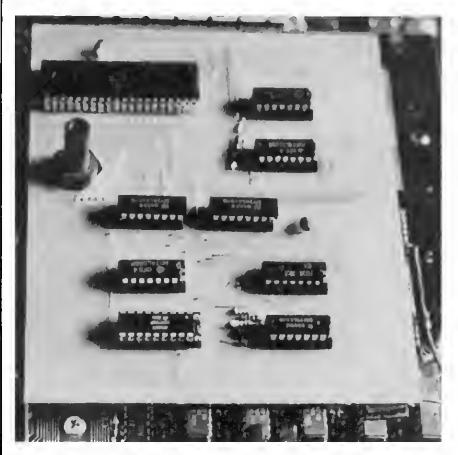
Complete lowercase board fits into VDG socket and around support port, and rest on banks of RAMs. When ICs are soldered to the board directly (they are socketed in this prototype), the RFI shield cover can be fit back in place.
